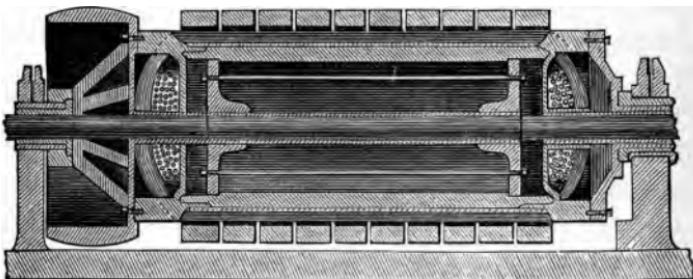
Siemens' Machine with Fixed Armature. Section.
